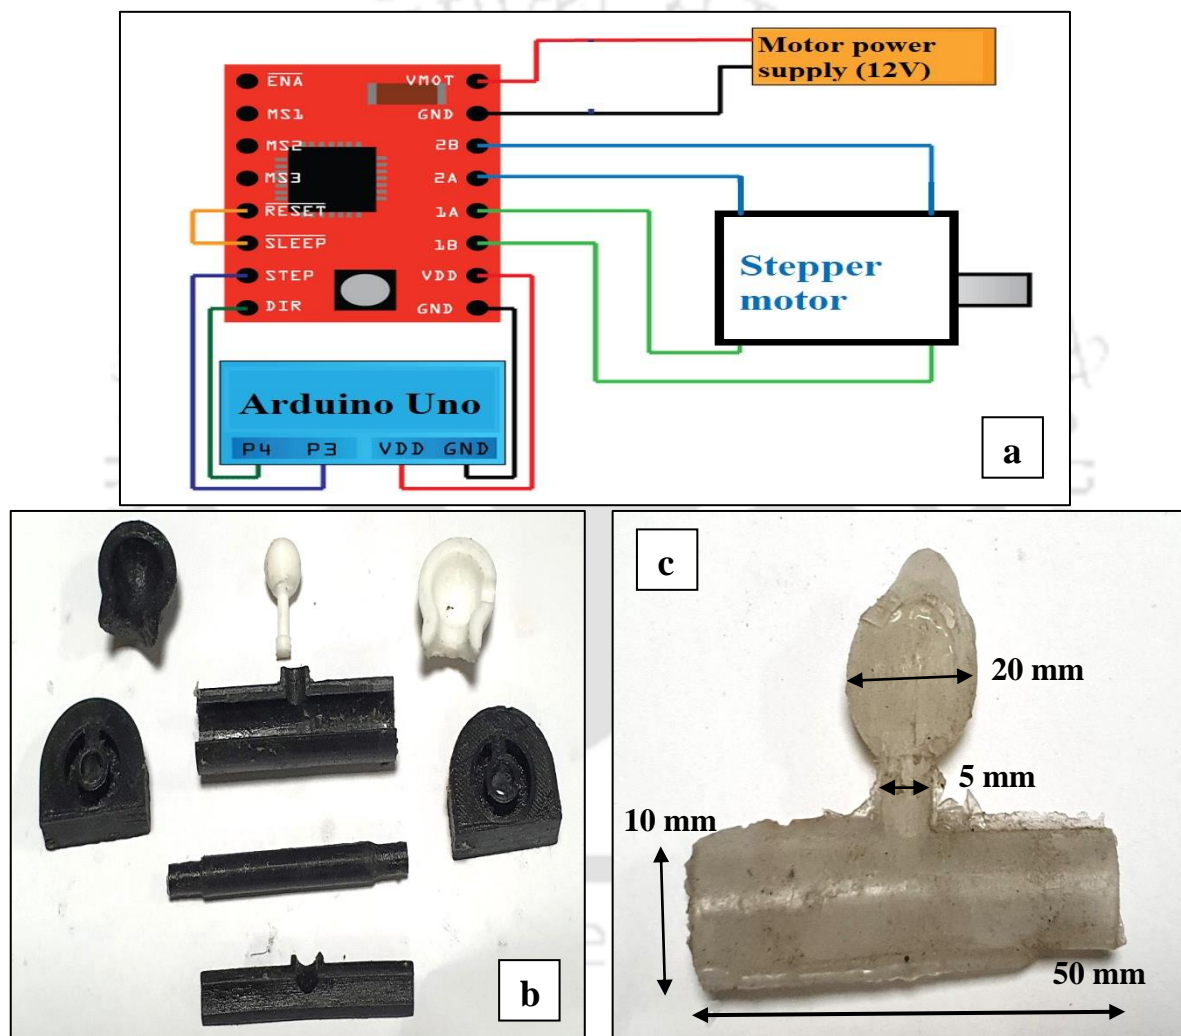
(a) schematic view of the stepper motor control circuit; (b) 3D printed mould used for making the aneurysm; (c) Aneurysm model made from silicone
